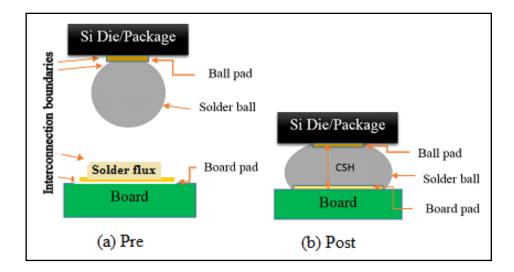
Pre & Post reflow stage of BGA solder joint assembly Source: (Pecht and Anupam, 2007)
